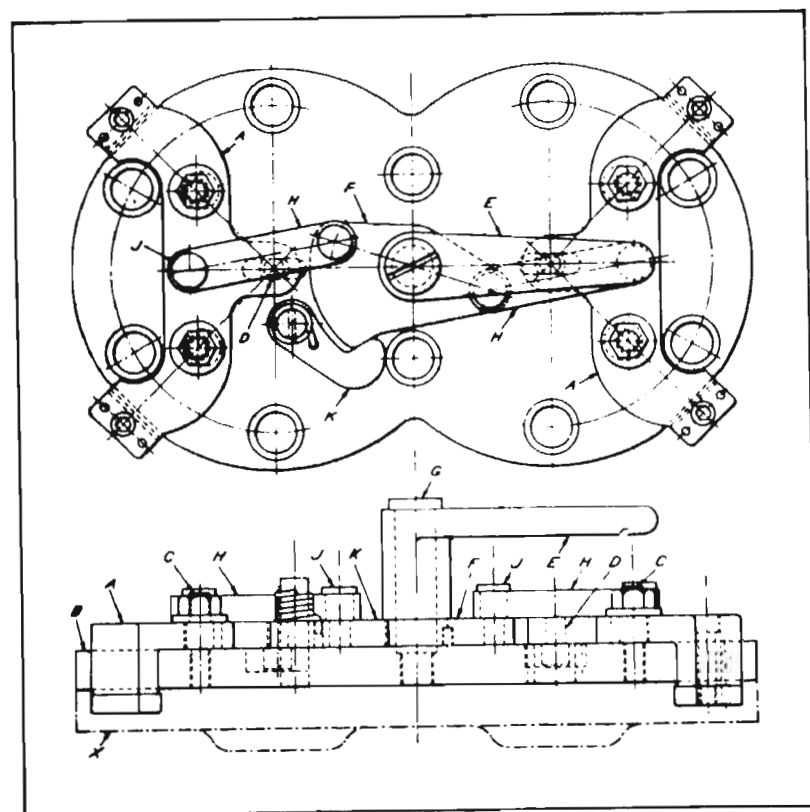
Work-piece X, which is a cast steam cylinder head for a duplex piston pump, is rigidly clamped at four points in this toggle action drill jig.
